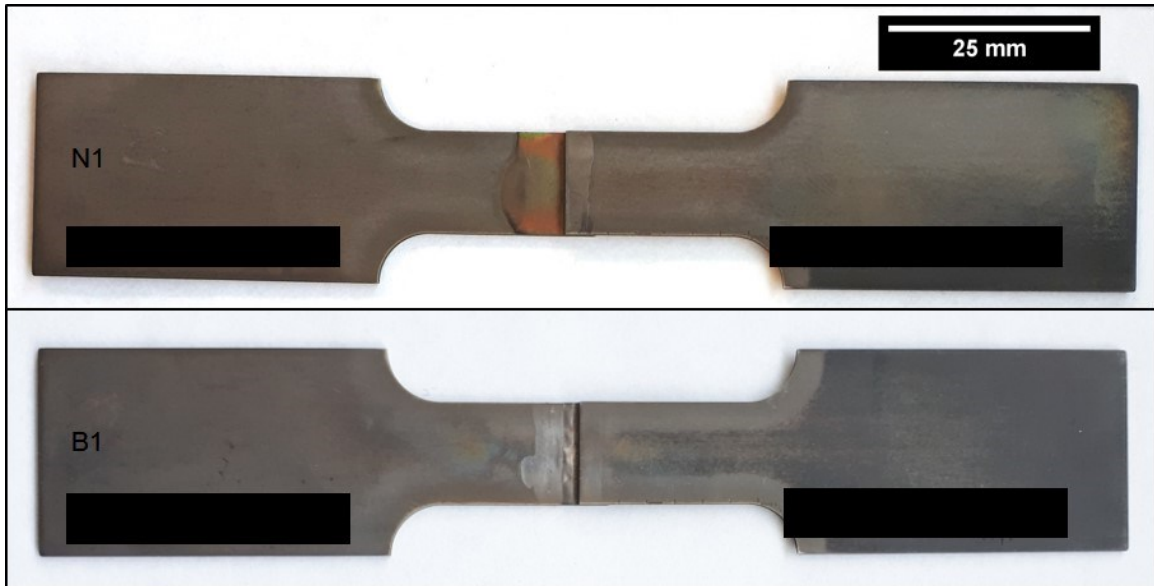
Ni30/IN625 (N1) and BNi-2/IN625 (B1) single lap shear joints after machining by wire EDM according to specifications in Appendix Figure C.2. Black bars cover Pratt and Whitney Canada identifying production codes.
